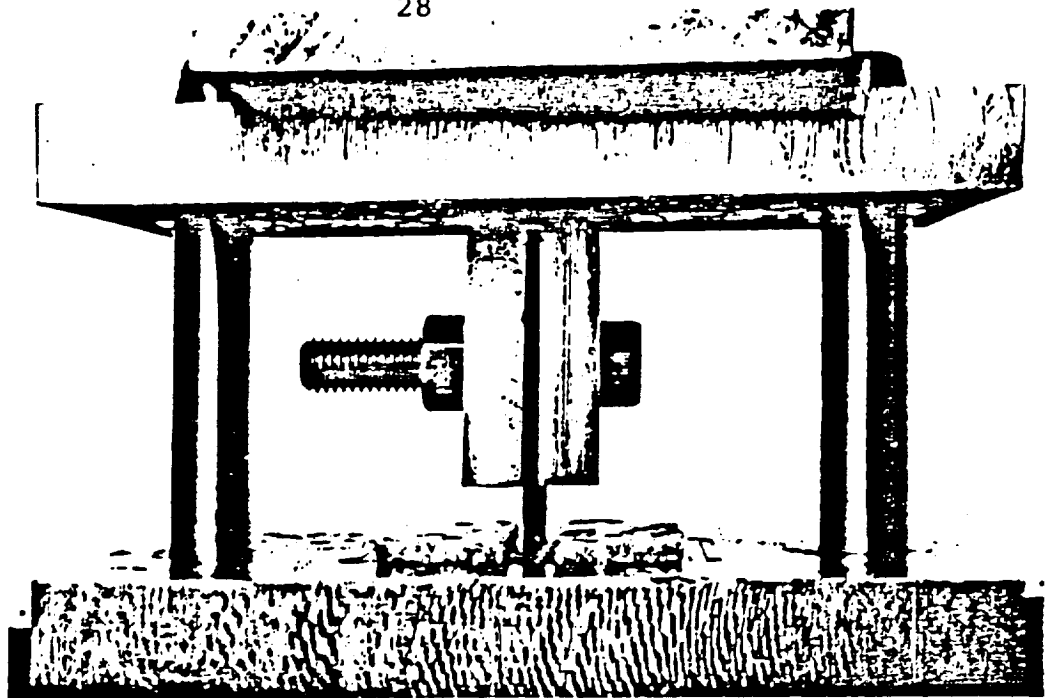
Fixture Used To Measure Bolt Bearing Strength
